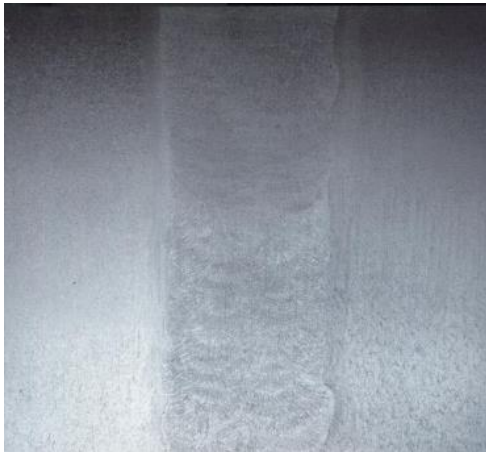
Macrostructure of a prototype welded rotor joint made of 25Kh2NMFA steel
